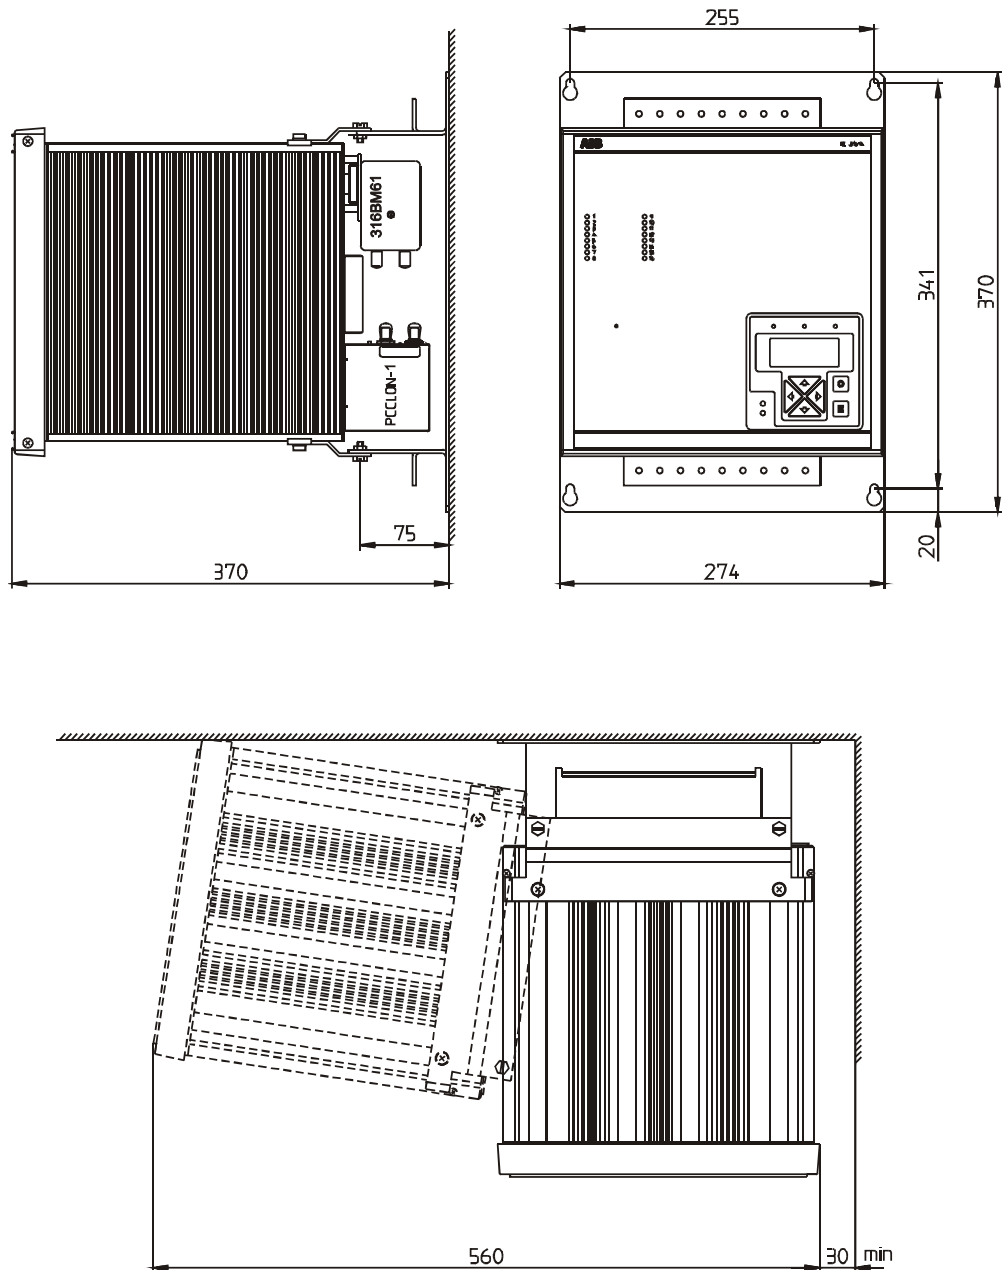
Surface mounting, casing able to swing to the left, rear connections. Size N2 casing.
